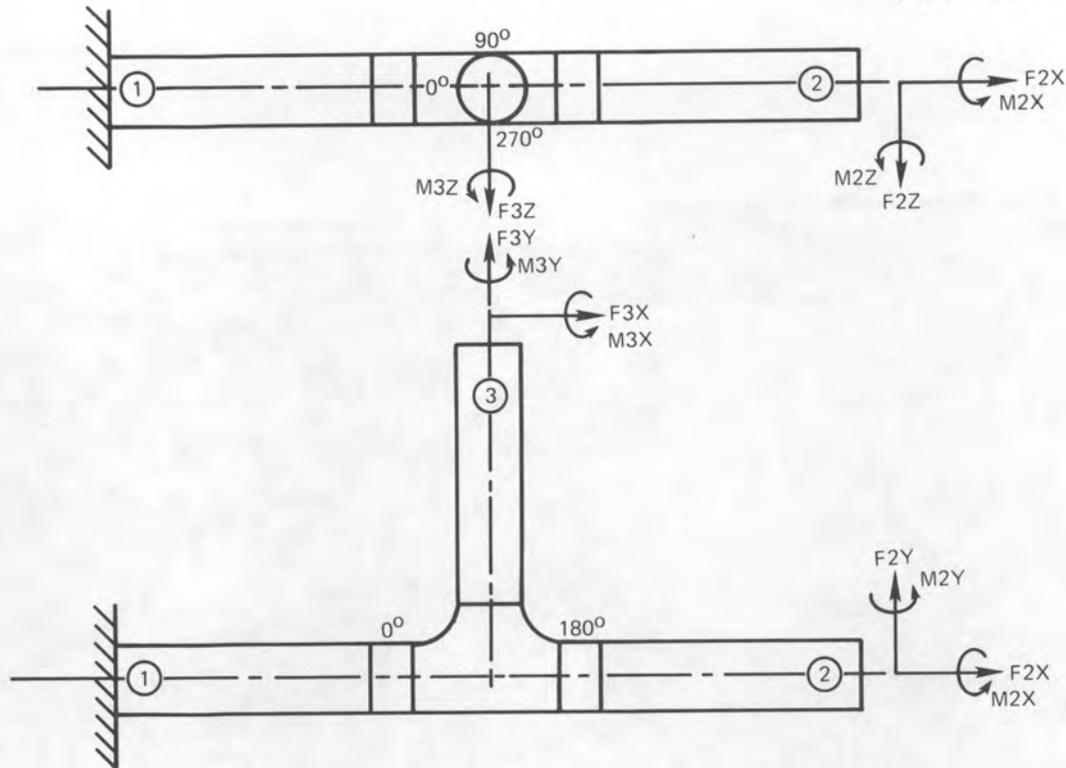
Loading nomenclature (all loads positive as shown).
